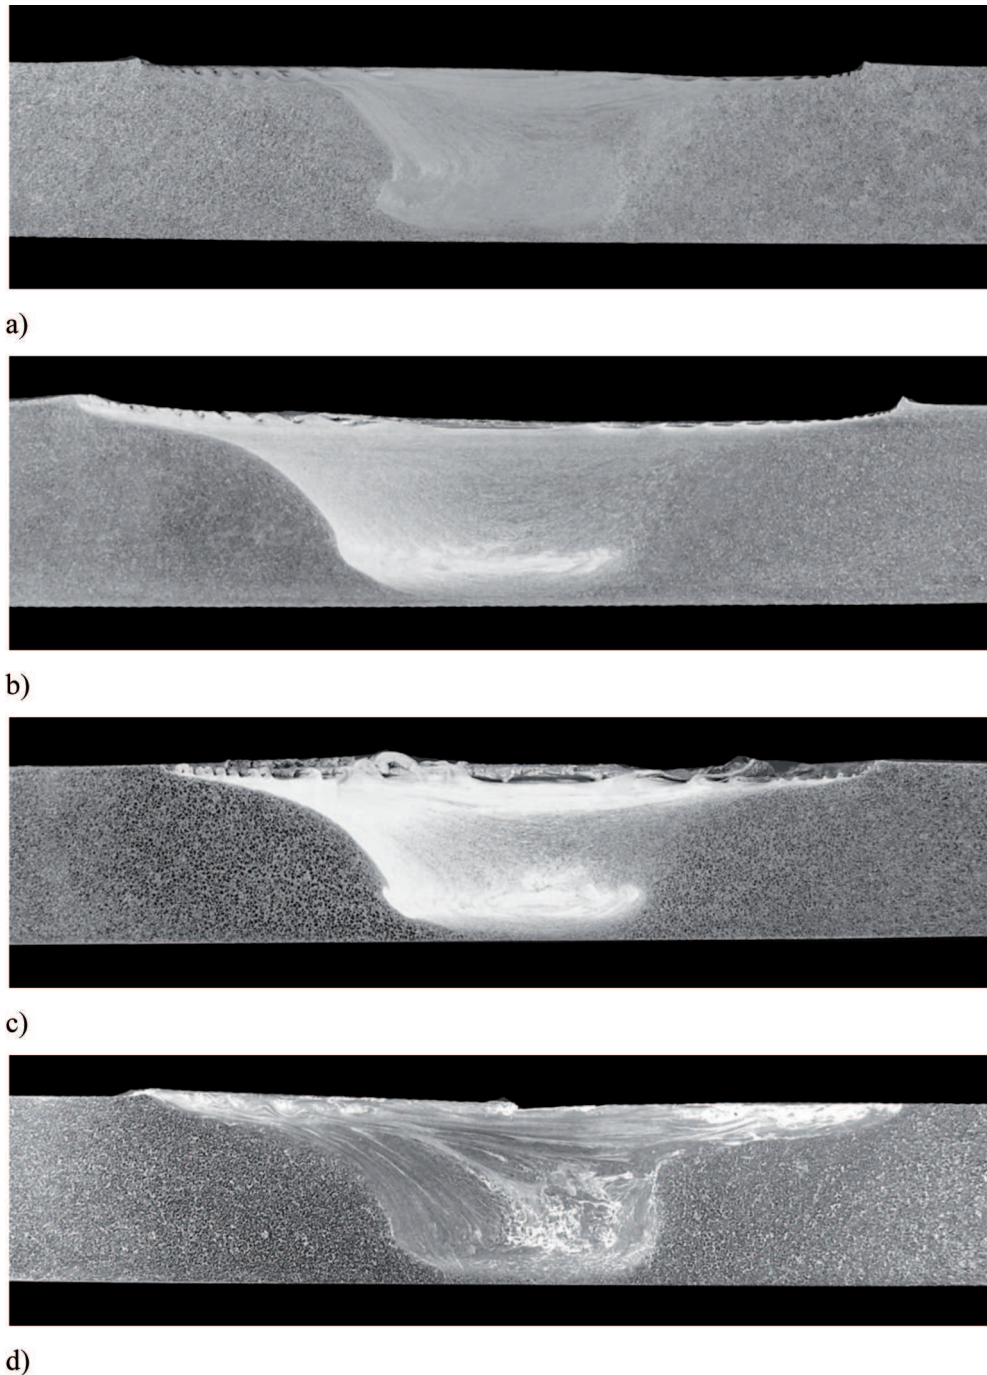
Macrostructures of welds in magnesium casting alloys: a) AZ91 alloy, b) ZRE1 alloy, c) MSR-B alloy, d) WE43 alloy. Welding parameters – item 3 of Table 1. (Etching: Keller, Magn. 6x)
